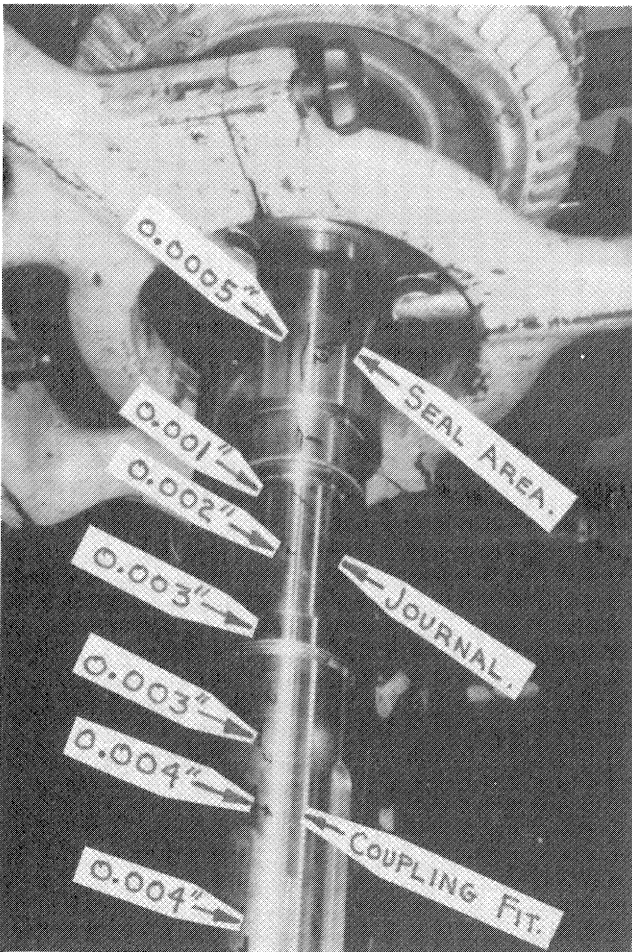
Runout Check of Motor Rotor Indicated a Bent Shaft Starting at the Bearing Journal.
